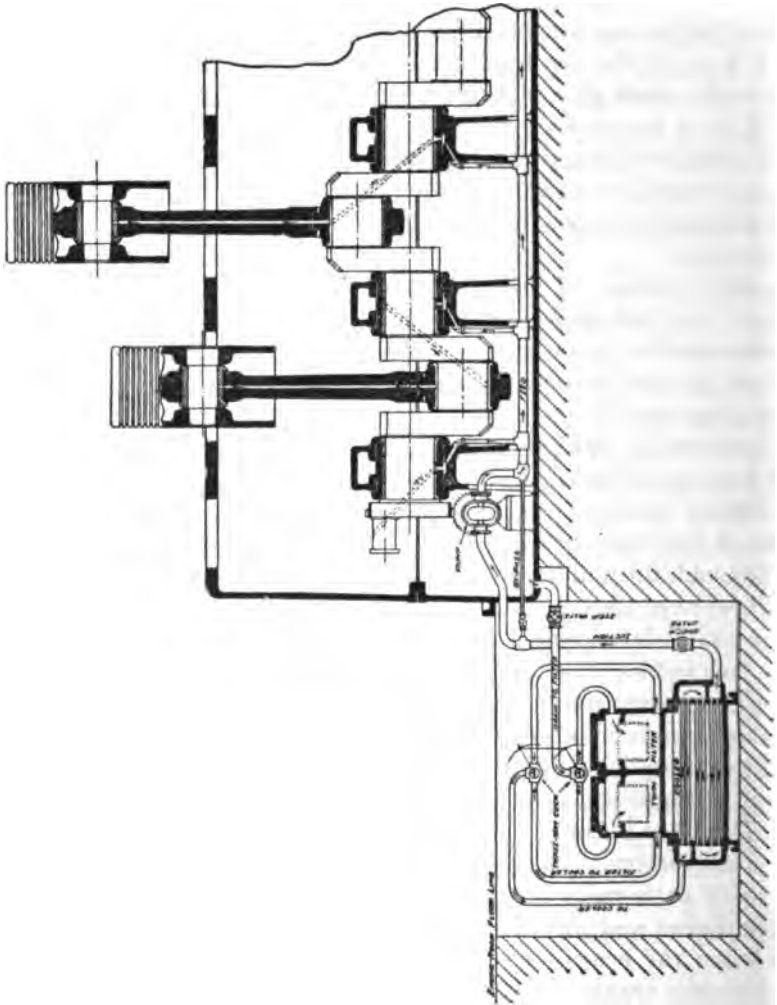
Lubricating system in which oil is supplied through the bottom of each main bearing.
